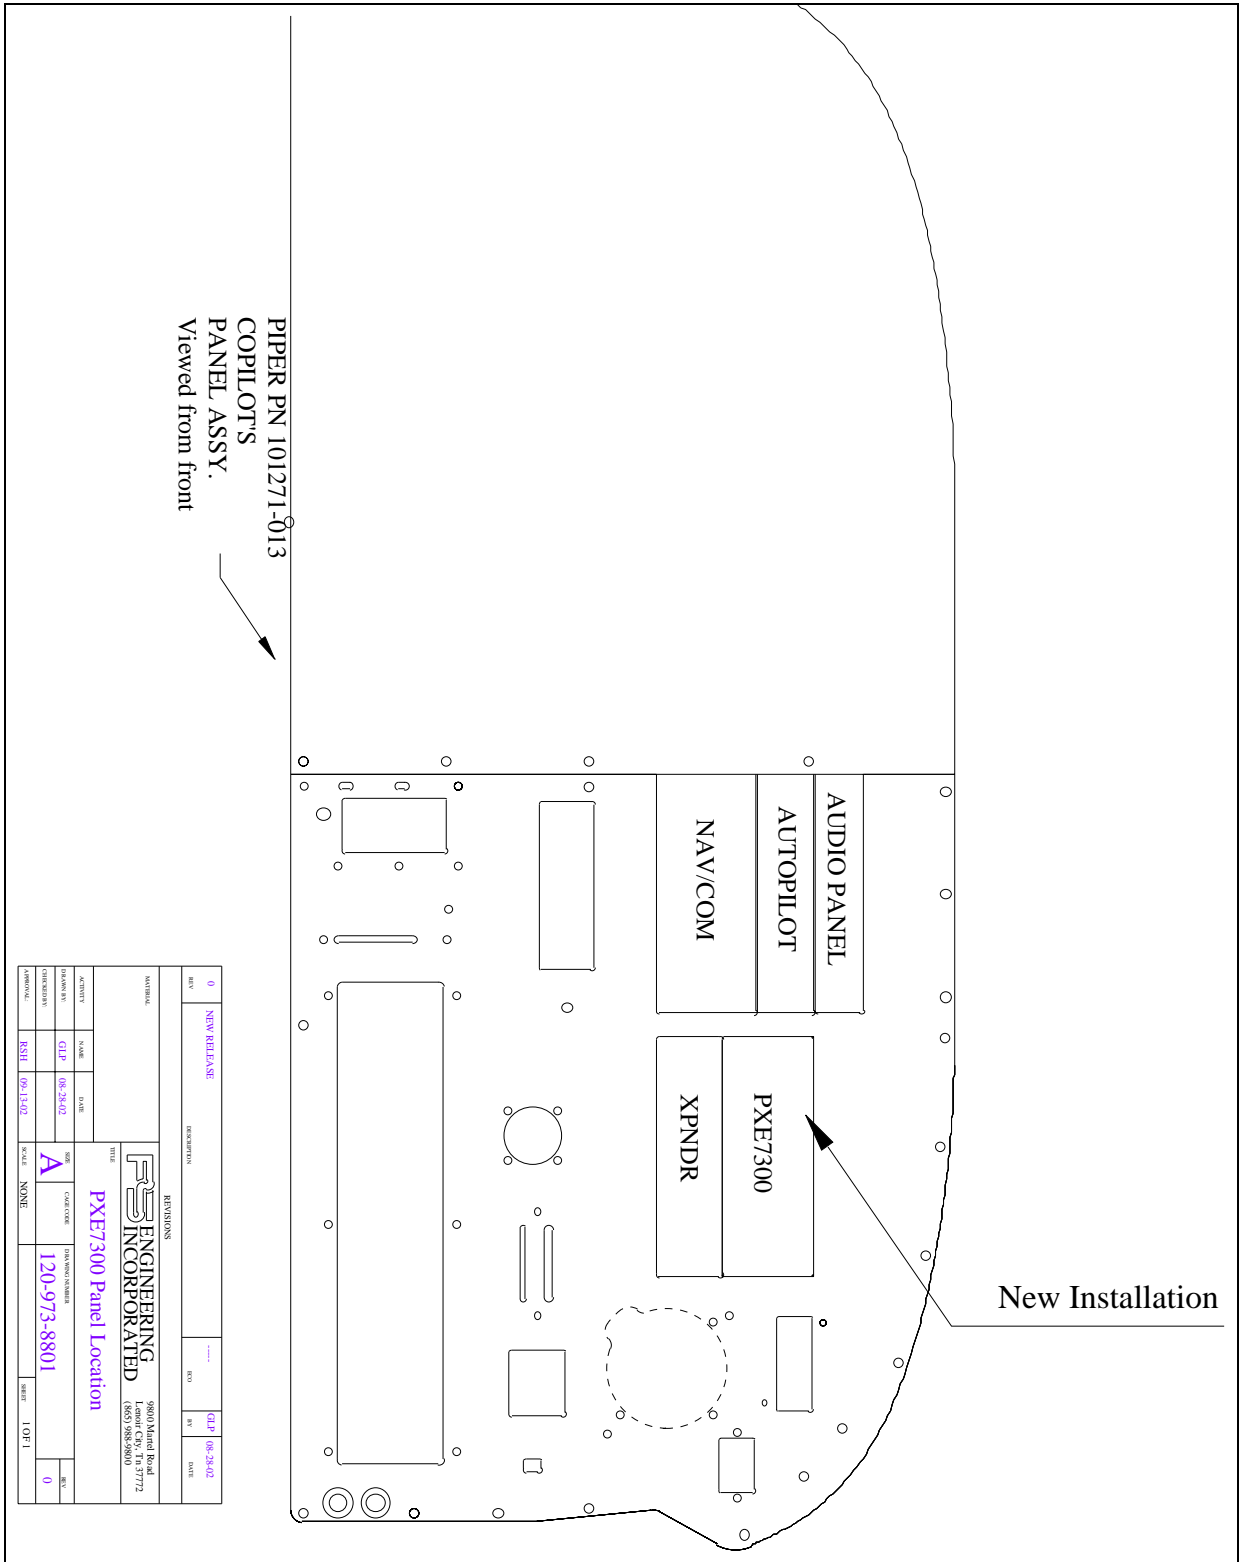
Panel Location Drawing (Typical) 120-973-8801
